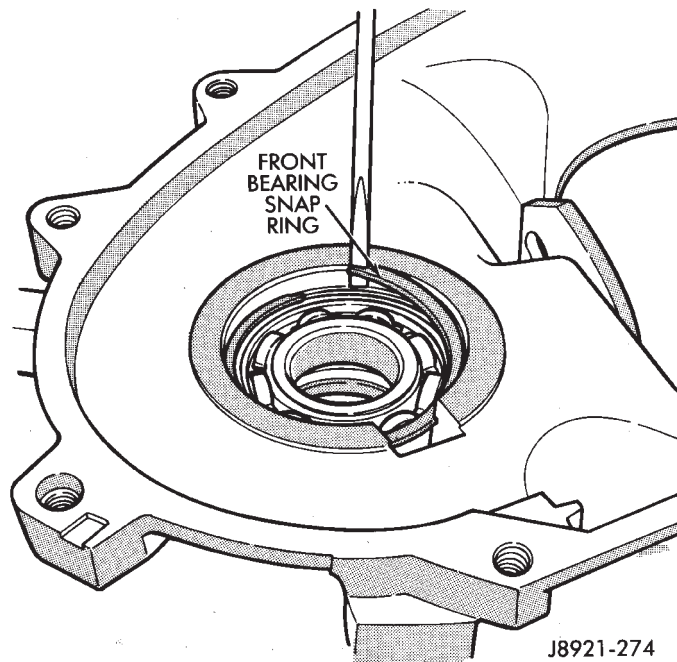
Front Output Shaft Front Bearing Snap Ring Removal
